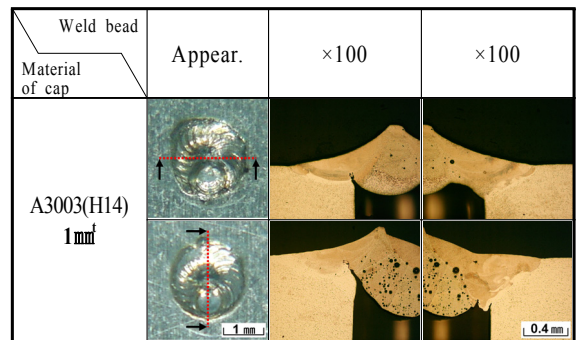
Welding of electrolyte injection hole by A4047 wire
